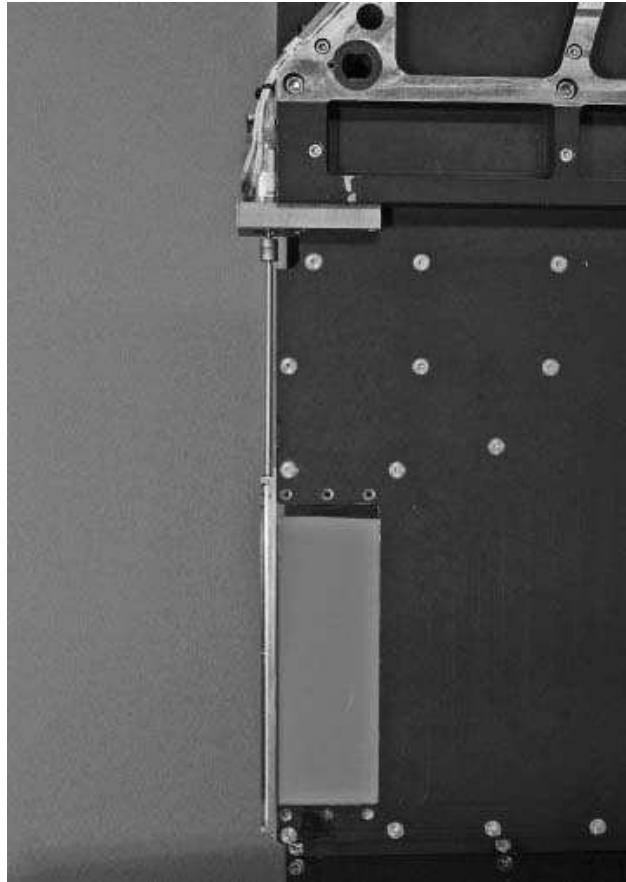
The rotary shutter assembly mounted on the fiber shoe. The small stepper motor used to drive the shutter is visible at the top center. This motor is coupled to the rotary shutter mechanism with a long shaft. The shutter itself is located at the lower left.
